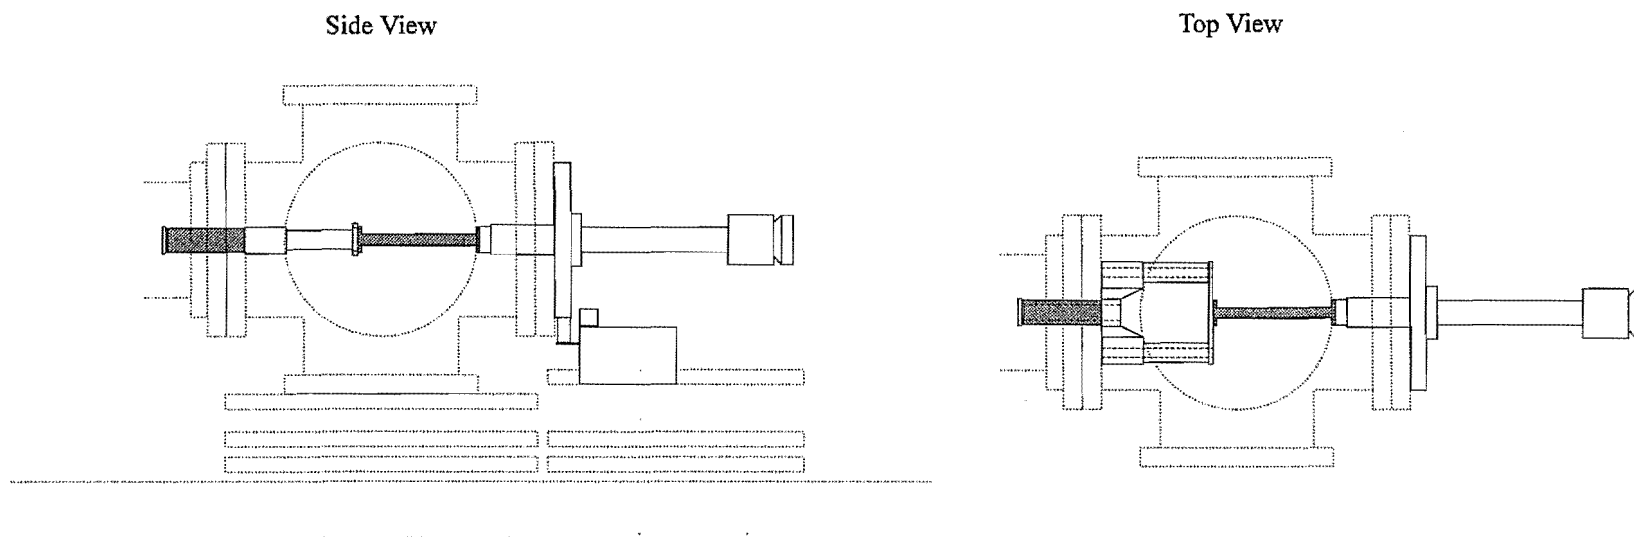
The required extensions (shaded) to the nozzle carriage assembly. The nozzle flange is mounted onto an xyz mount, similar to the chamber mounts, and held by a single bolt beneath the flange.
